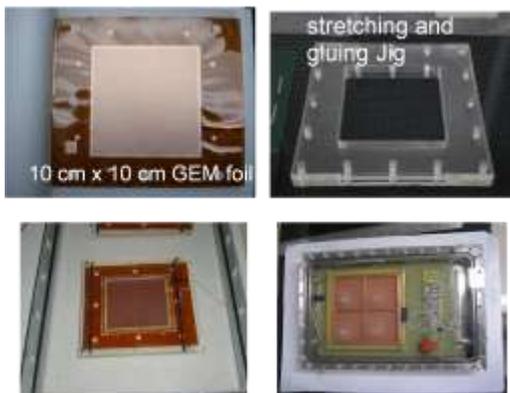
Fabrication of the prototype and schematic arrangement of prototype chamber assembly
